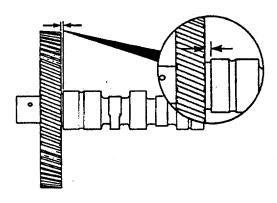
Measuring Gear and Shoulder Clearance.
